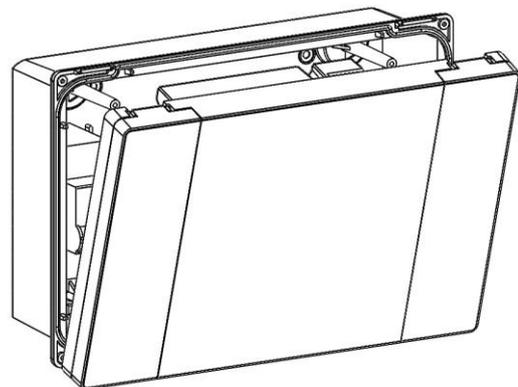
Using the three pre-existing holes fix the bottom of the box with three screws of adequate length in relation to the thickness of the wall on which to fix the frame. Place a rubber washer (supplied) between each fixing screw and the bottom of the case. Then reassemble the battery (if present).
